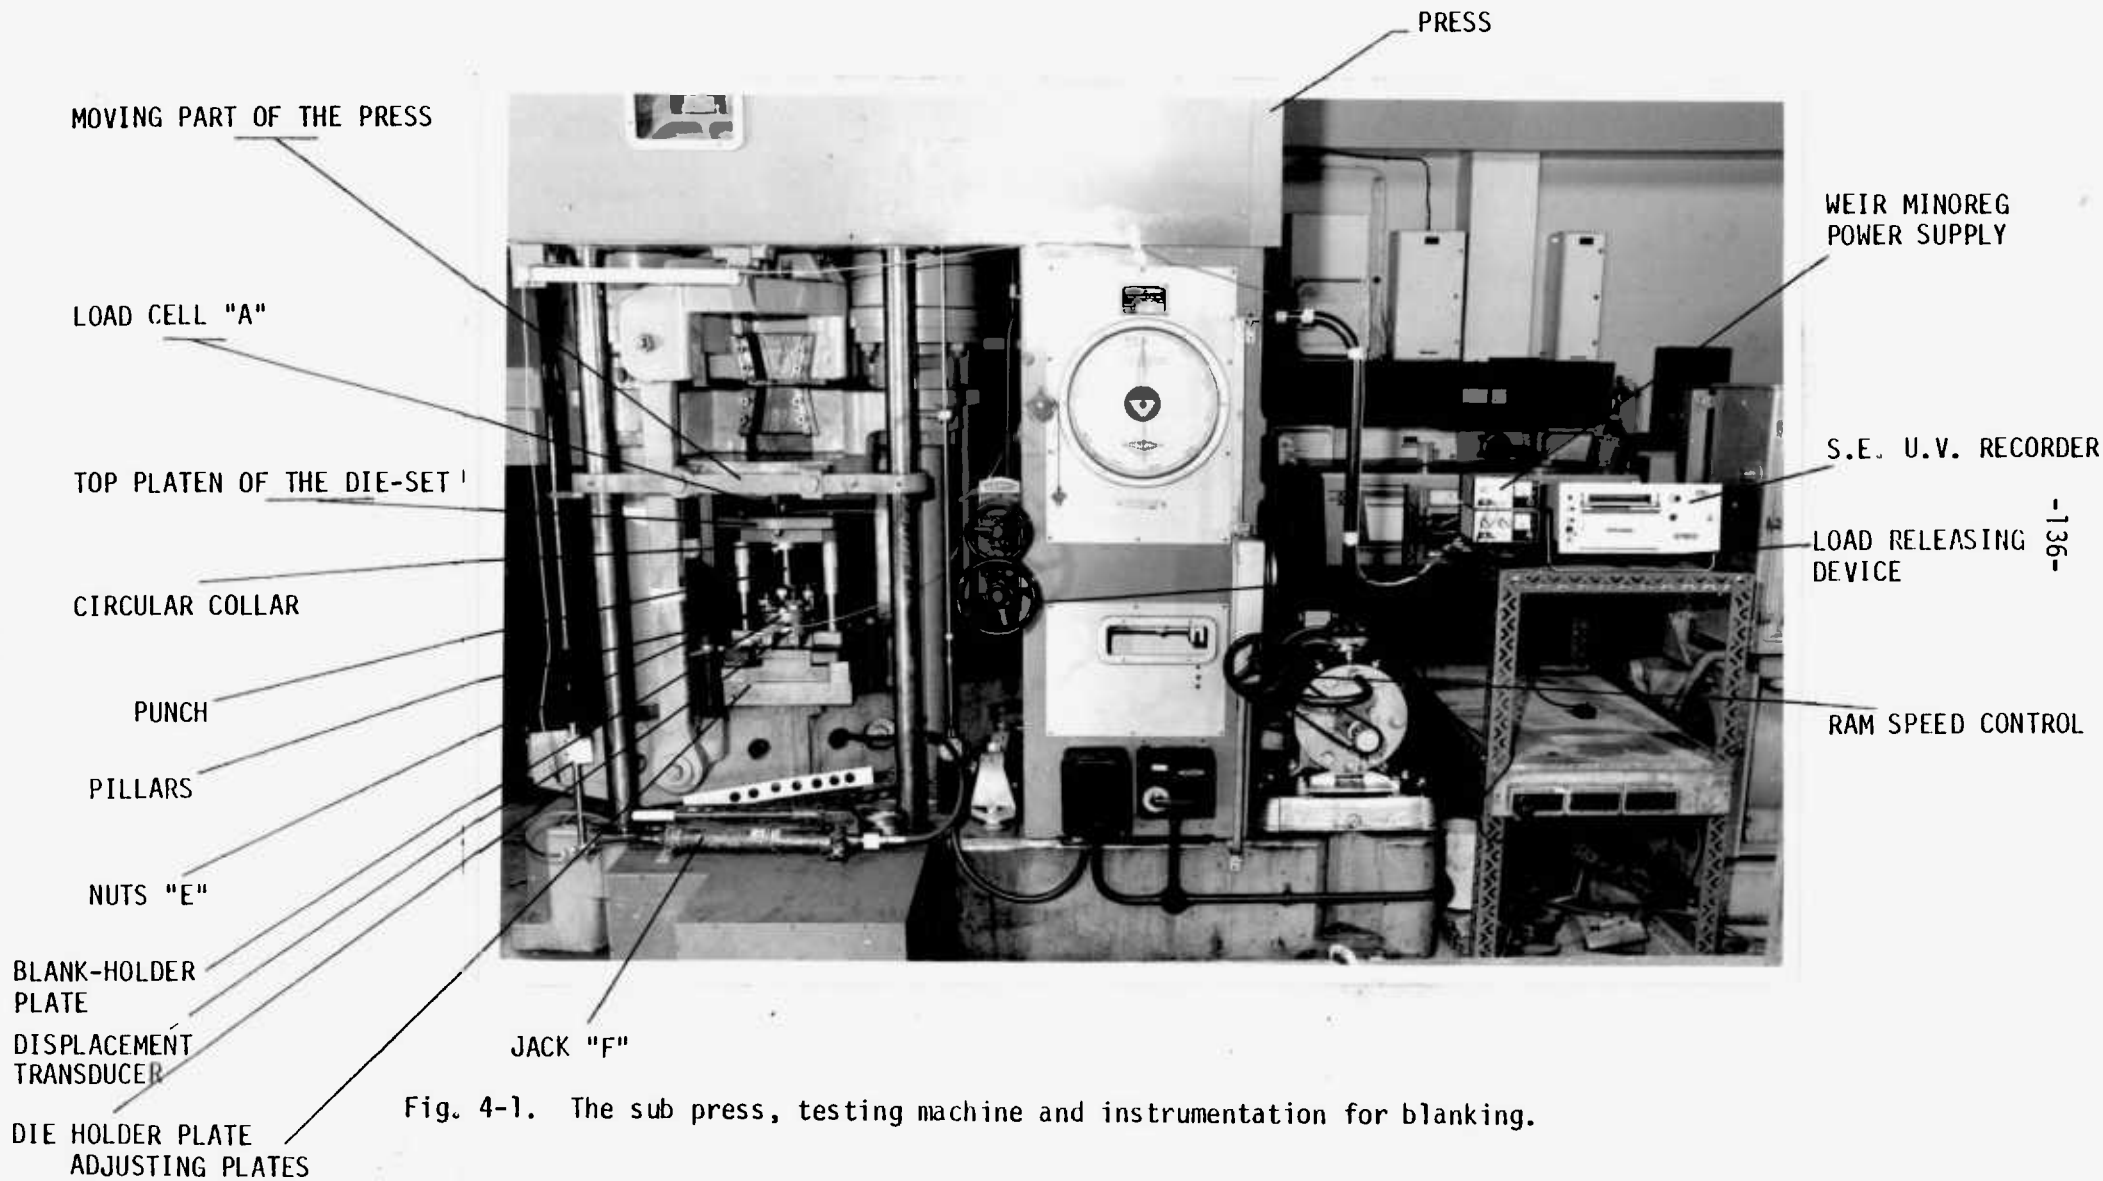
The sub press, testing machine and instrumentation for blanking.
